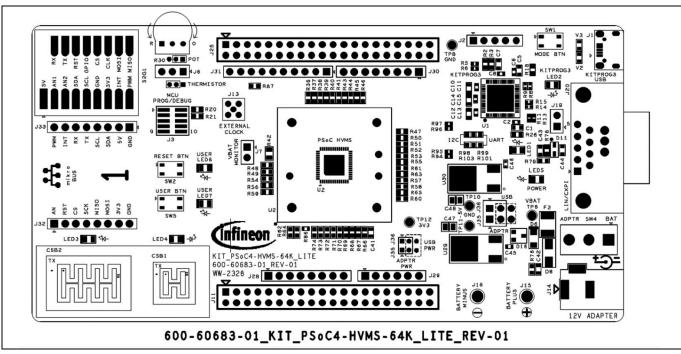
Top view of KIT_PSoC4-HVMS-64K_LITE kit assembly drawing
